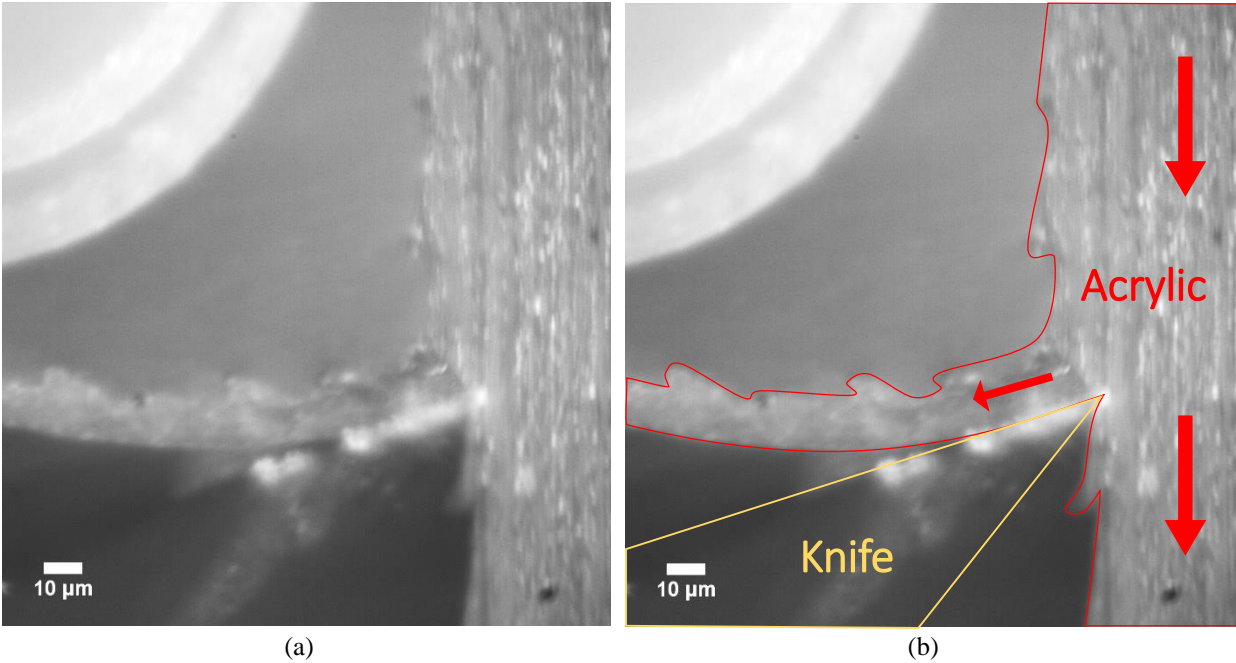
Tear-out cutting observed in an Acrylic stepped-width specimen cutting experiment, test ID #868, frame 732, 1.1 mm width of cut (a) original video still (b) annotated video still highlighting the jagged tear-outs on the incoming material left over from the previous cutting pass and on the newly-created surface. The direction of material flow is shown with filled red arrows.
